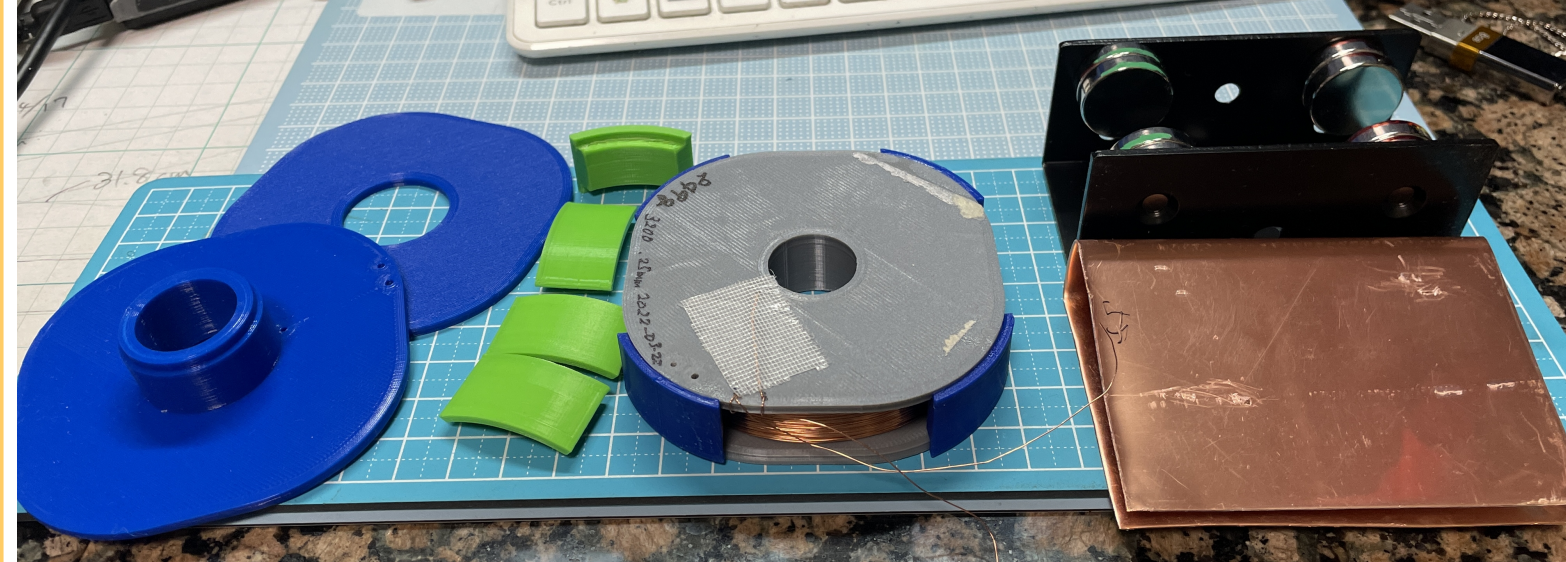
Bobbin, coil, copper damper and magnetic circuit
